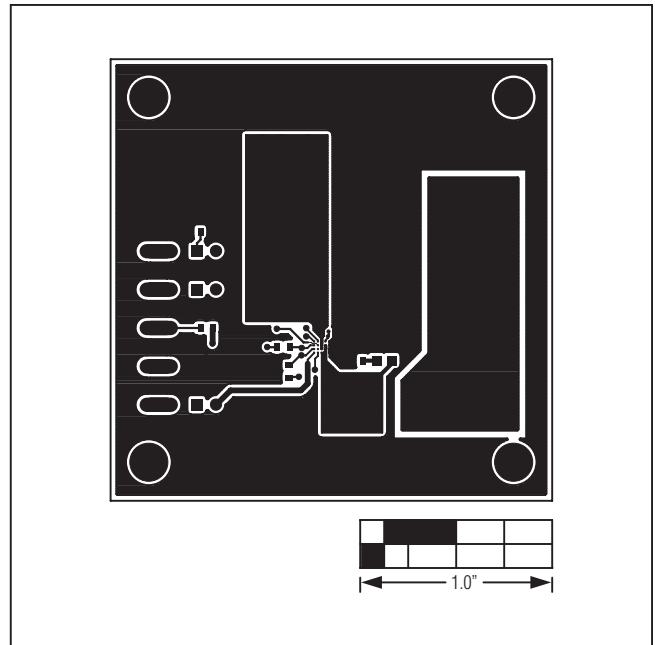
MAX15109 EV Kit Component PCB Layout—Component Side
